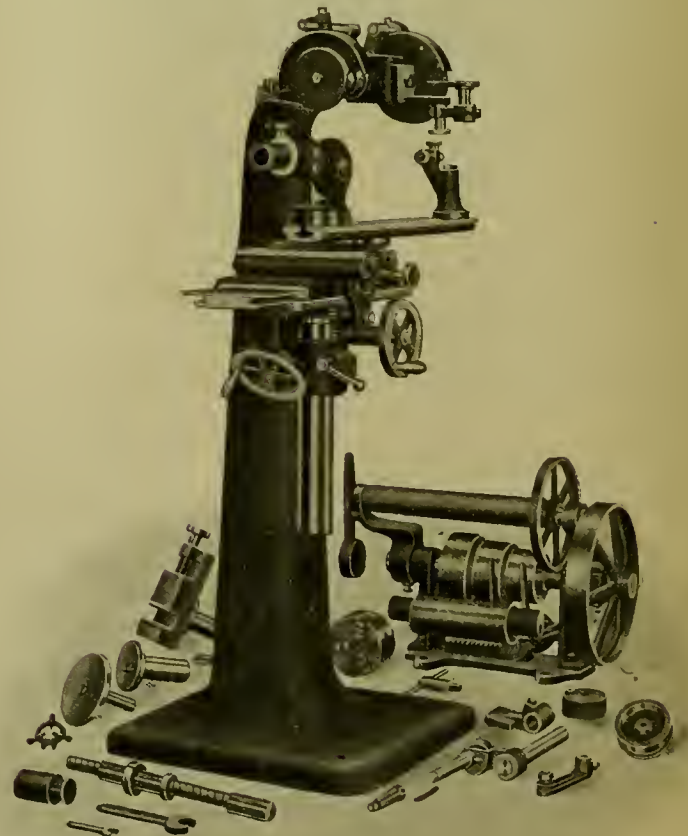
MILWAUKEE UNIVERSAL CUTTER AND TOOL GRINDER.
